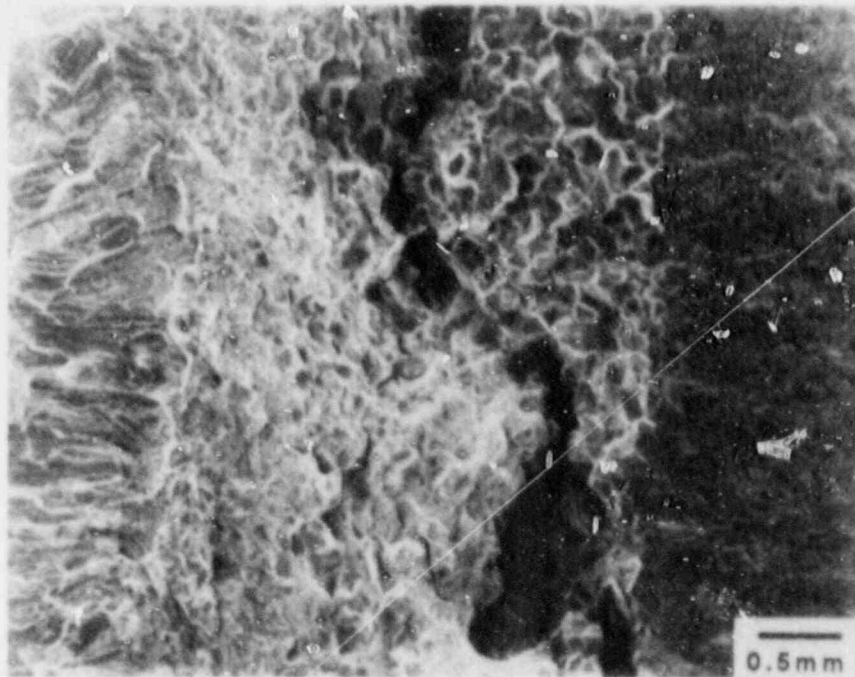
Fracture Surface of LTCT Weld Overlay Specimen Showing a Branched Intergranular Crack in the Base Material.
